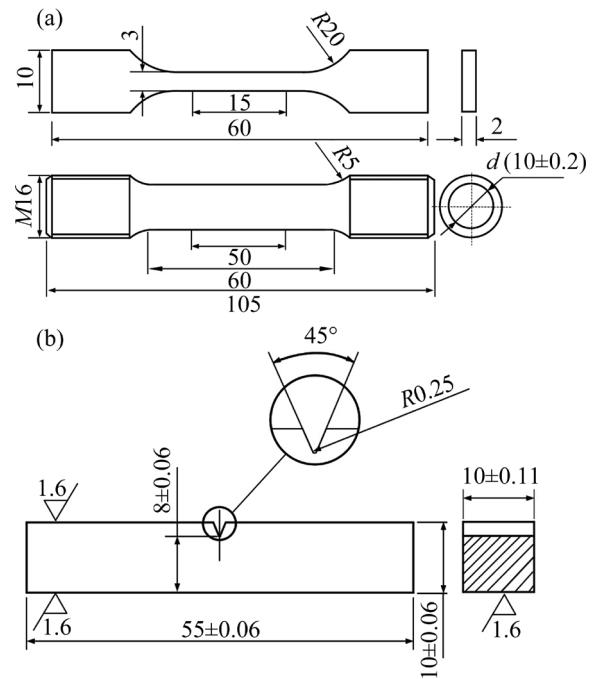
Specimen dimensions for mechanical performance testing: (a) Tensile specimens; (b) Impact specimens (Unit: mm)
